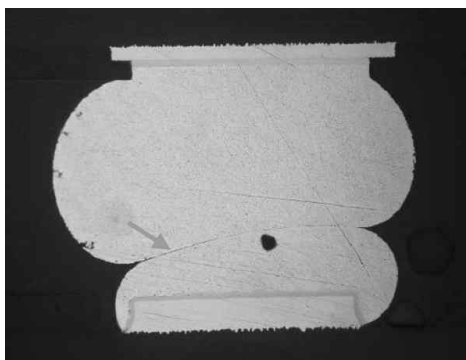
Dewetting failure of Lead-free solder ball¹⁹⁾
